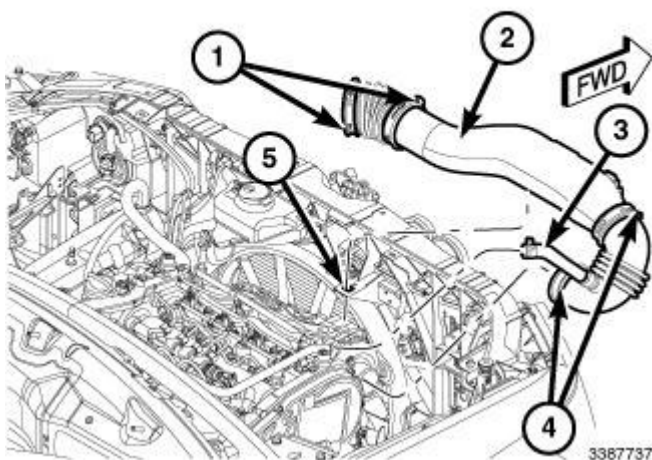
Clean Air Intake Hose Assembly & Front Mount
